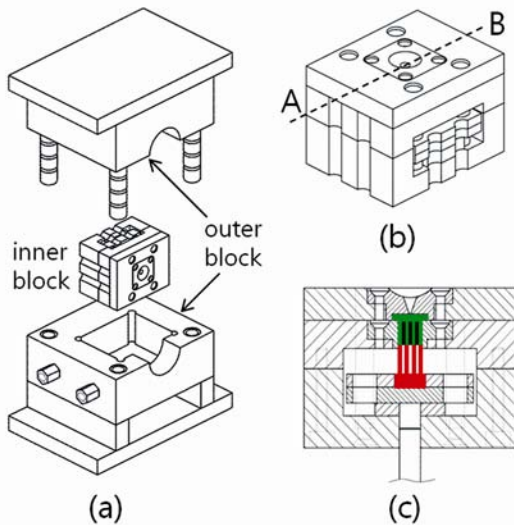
(a) A perspective view of the cassette mold, (b) a perspective view of the inner block, and (c) a cross-sectional view along the dotted line A-B
